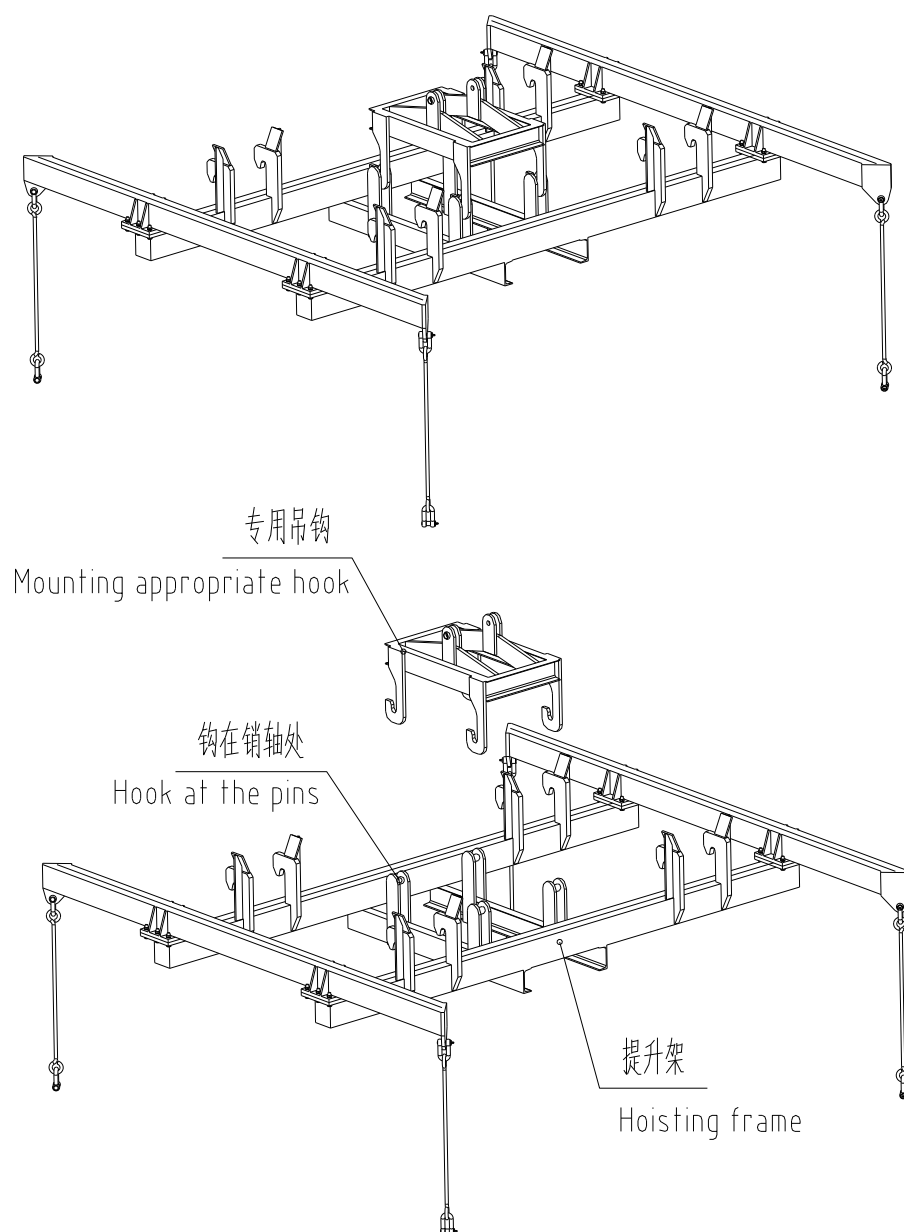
Hang the hoisting frame on the mounting trolley
